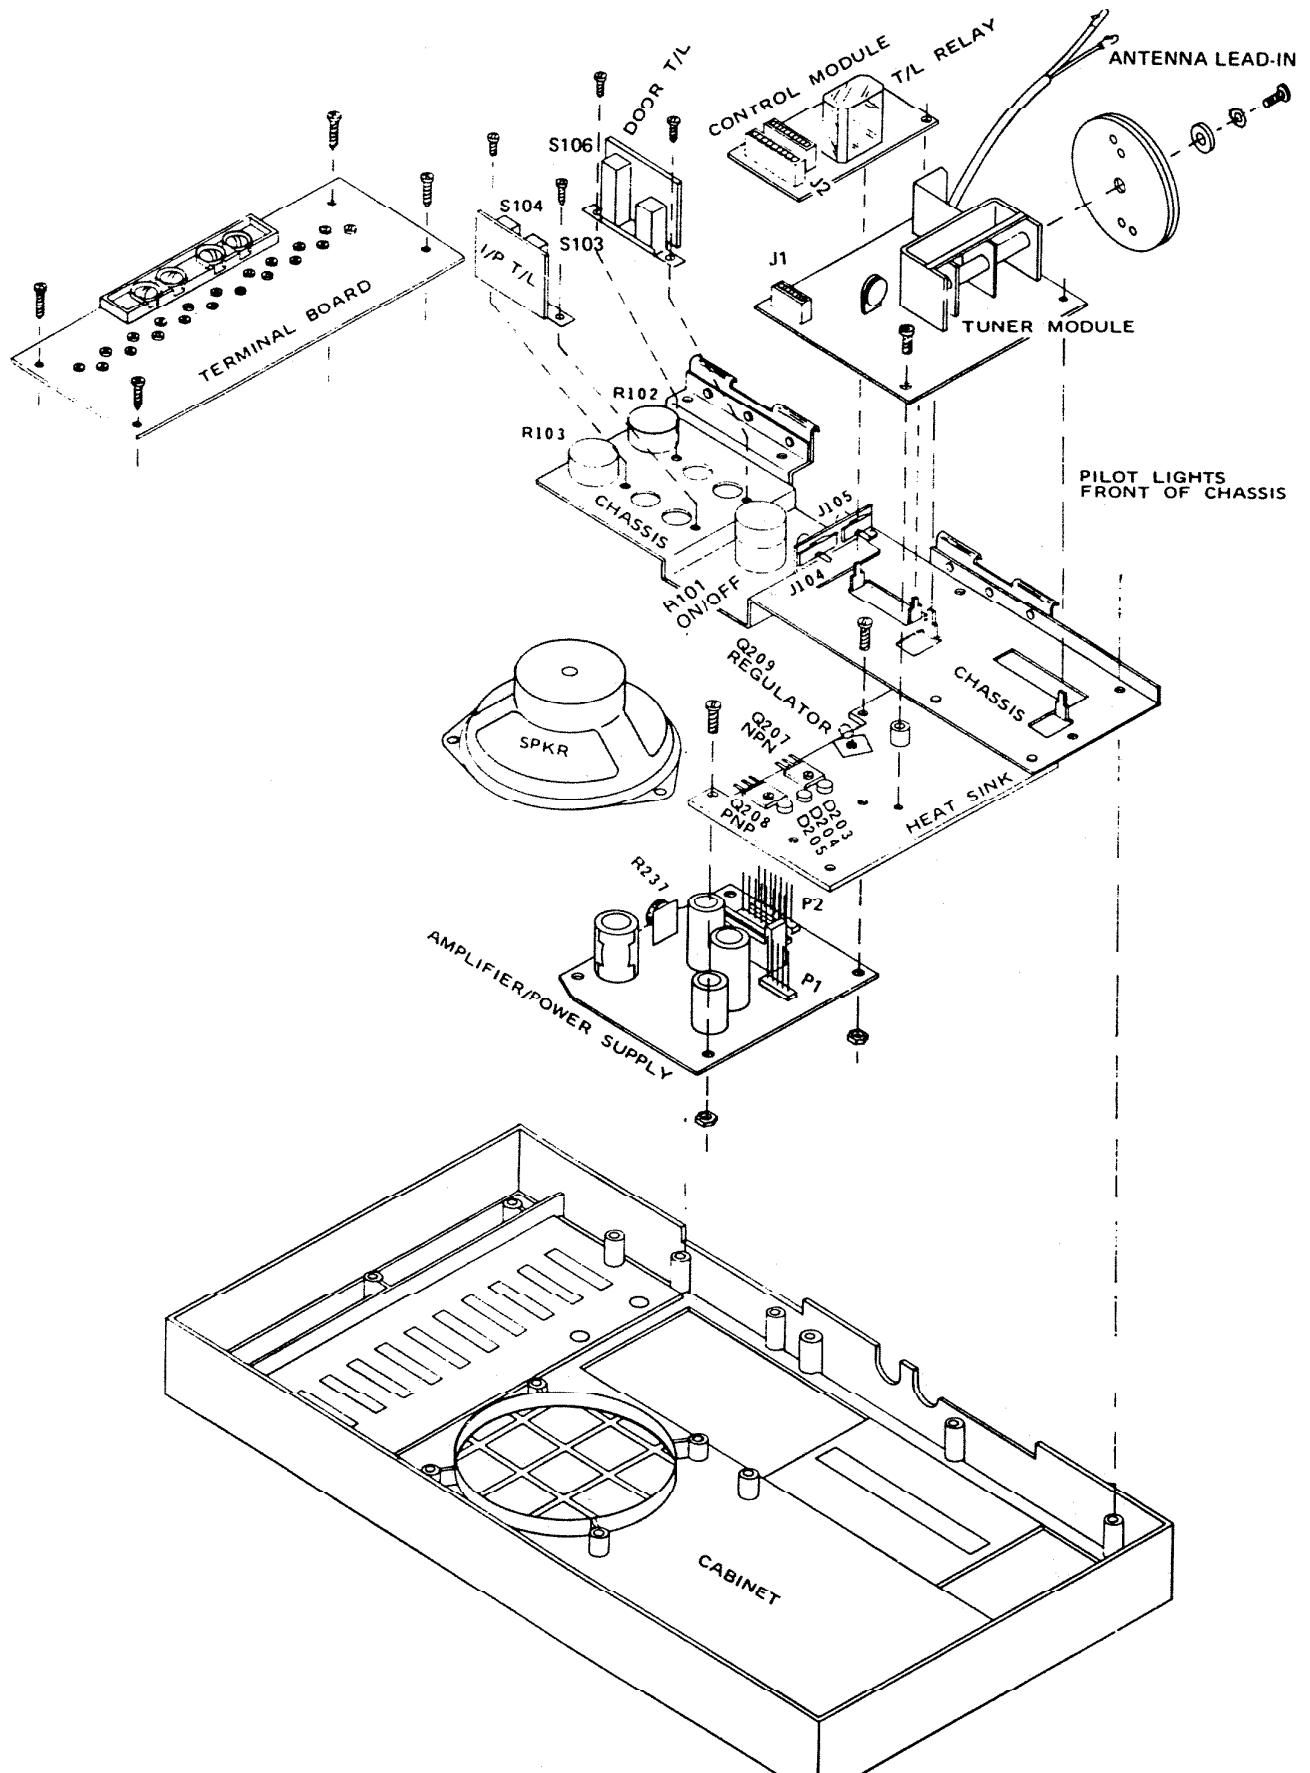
EXPLODED VIEW IM-406 MASTER UNIT
